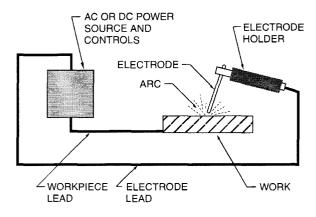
Typical Welding Circuit for Shielded Metal Arc Weld
